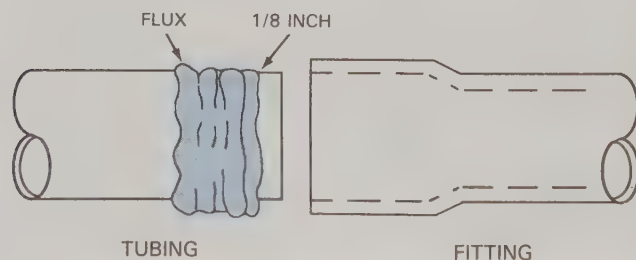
Flux should be applied to the tubing, not the fitting. As shown, approximately 1/8 in. of tubing at the cut end should not be fluxed. This will help avoid contaminating the system with soldering flux.
